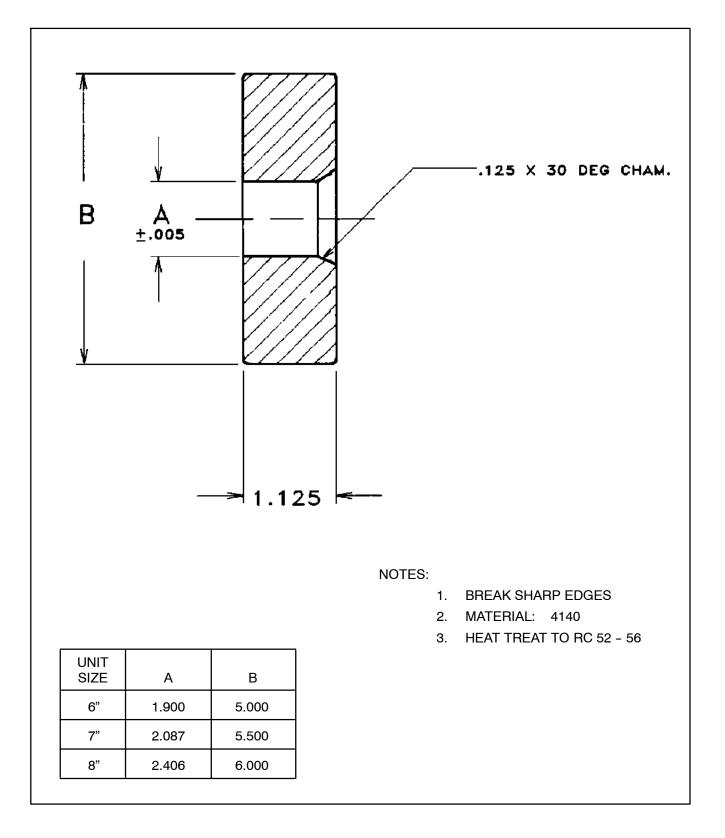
BEARING PRESS TOOL - MECHANICAL SEAL UNITS - SK2156
